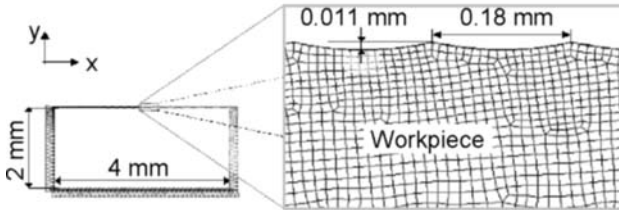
Dimensions of the workpiece for 2D simulations and the initial surface geometry
